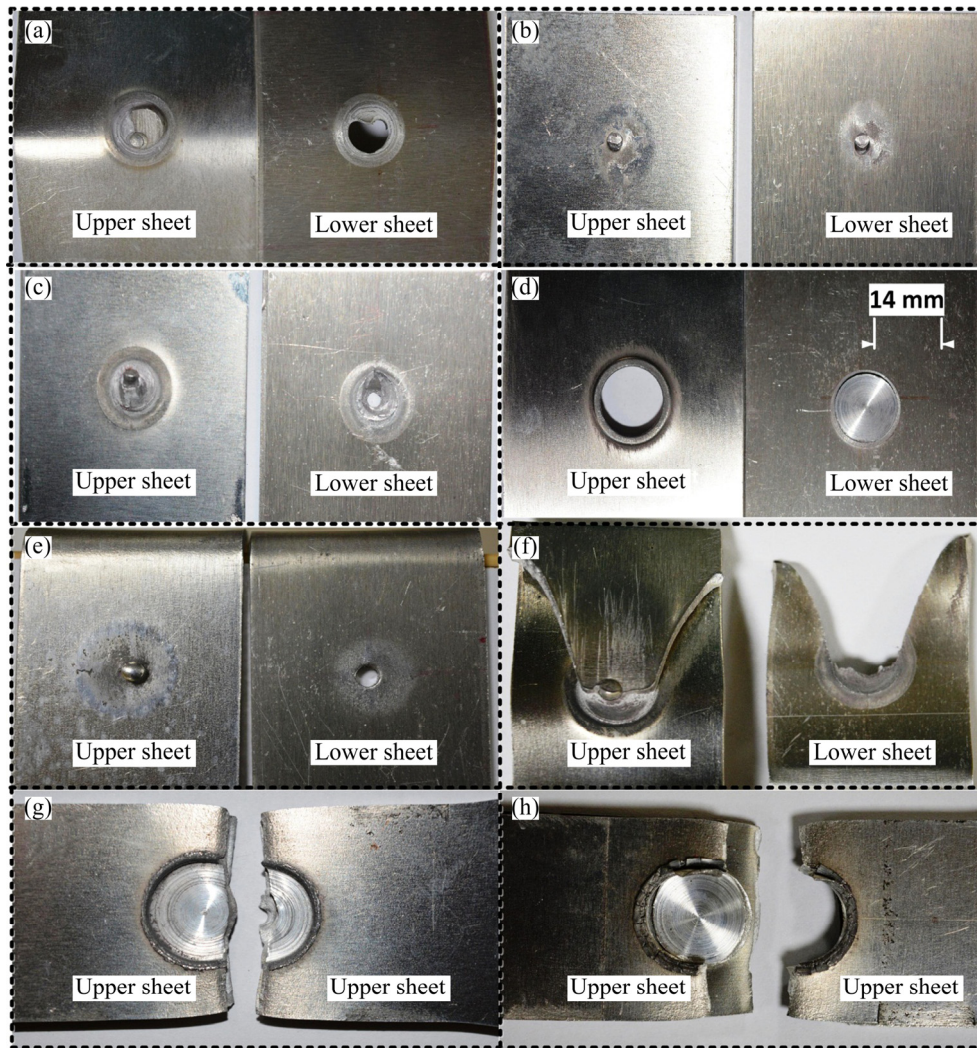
Modes of failure during testing of FSF joints: (a) Partial bond delamination; (b) Pin shear; (c) Combined pin shear and bond delamination; (d) Tear-off; (e) Pin pull-out; (f) Combined partial bond delamination and sheet tear; (g) Stir spot fracture; (h) Base metal fracture
